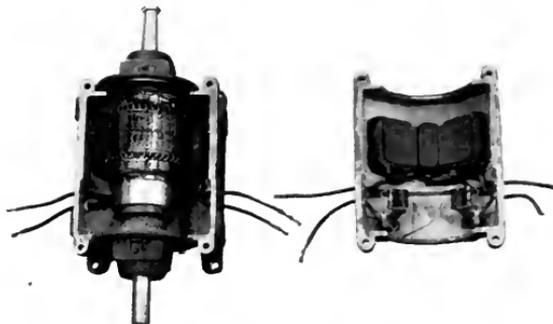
Motor with Top Half of Frame Removed. Interior of motor easily inspected, two main poles, and one commutating pole in each half of frame
